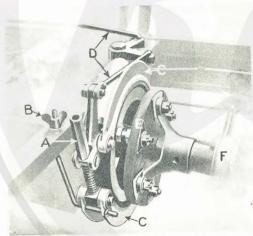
THE TRANSMISSION OR PEDAL BRAKE OF THE 14 H.P. "STANDARD."
